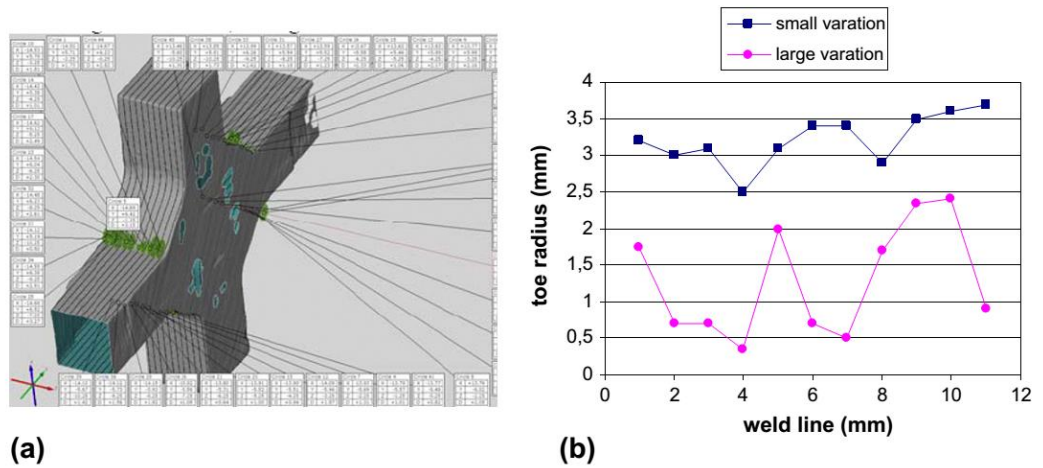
Measurements of toe radius along weld a toe line: (a) 3D surface of weld, (b) results showing small and large variations in the measurements of the weld toe radius [47]
